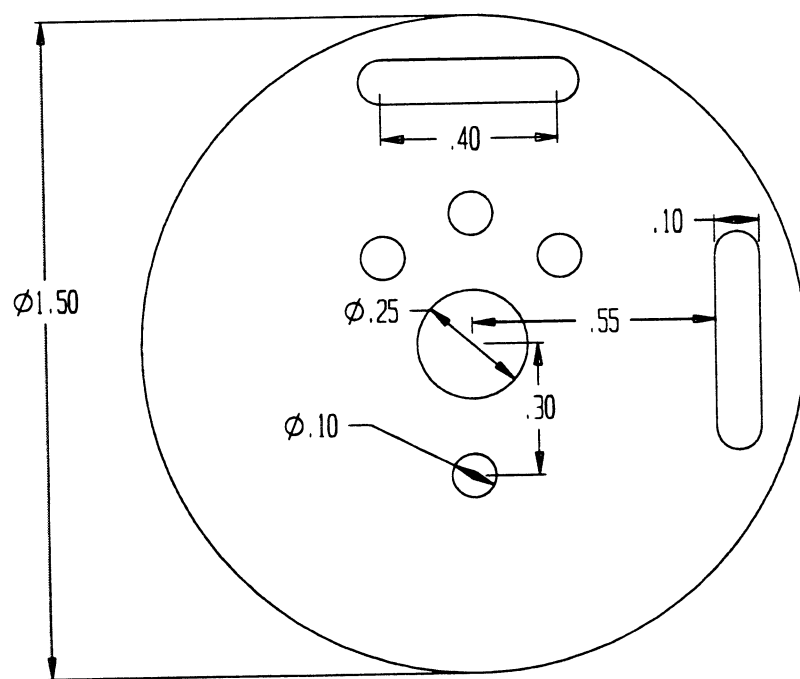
Motor Mounting Bracket - Machine Drawing
